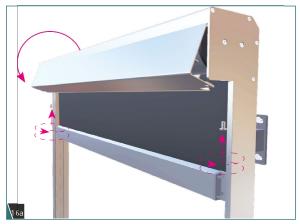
Installation application in the case of: Zipner 90, Zipner 110. Disassemble and screw the inspection part of the cassette (two side screws at the bottom of the cassette).
